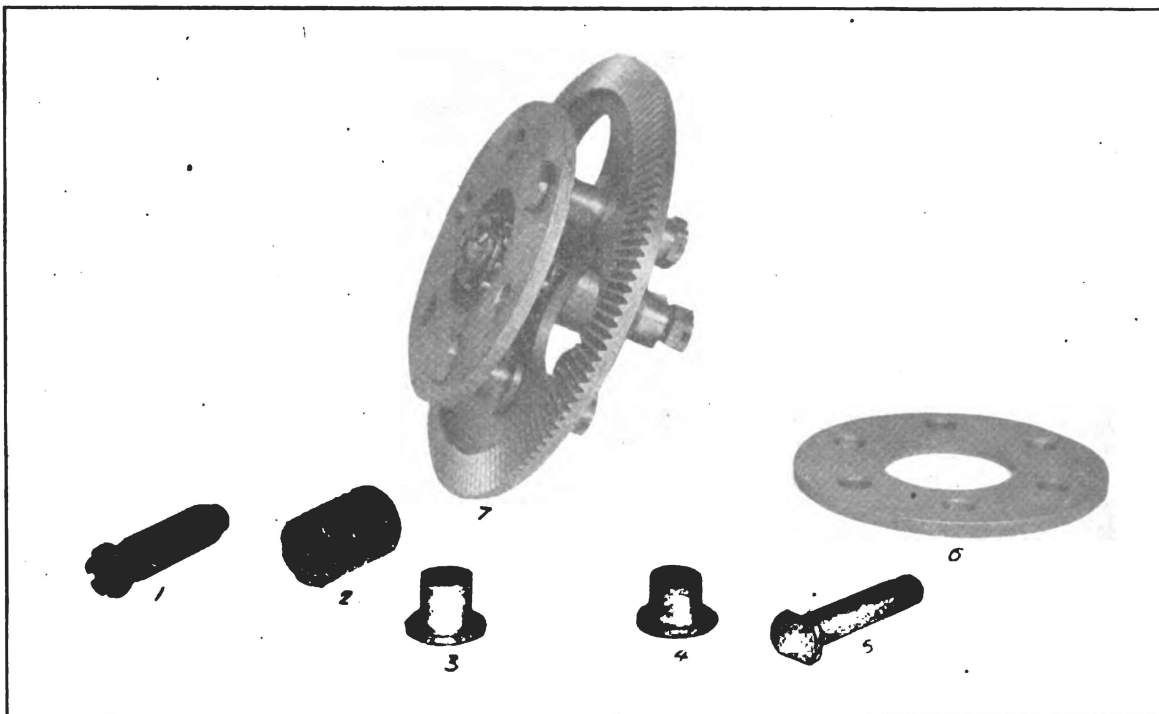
Bijur (rear end) starter, bevel and idler gear parts
